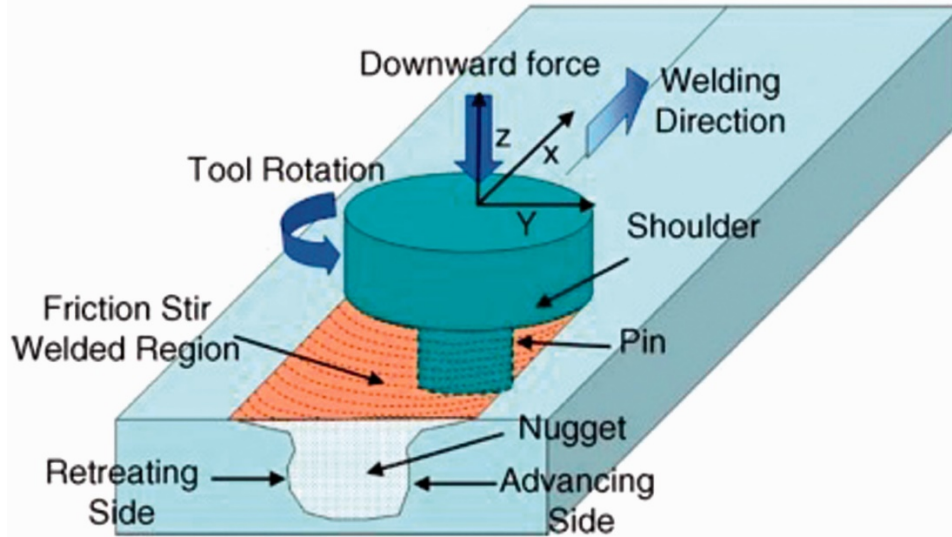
Schematic of friction stir welding process.
